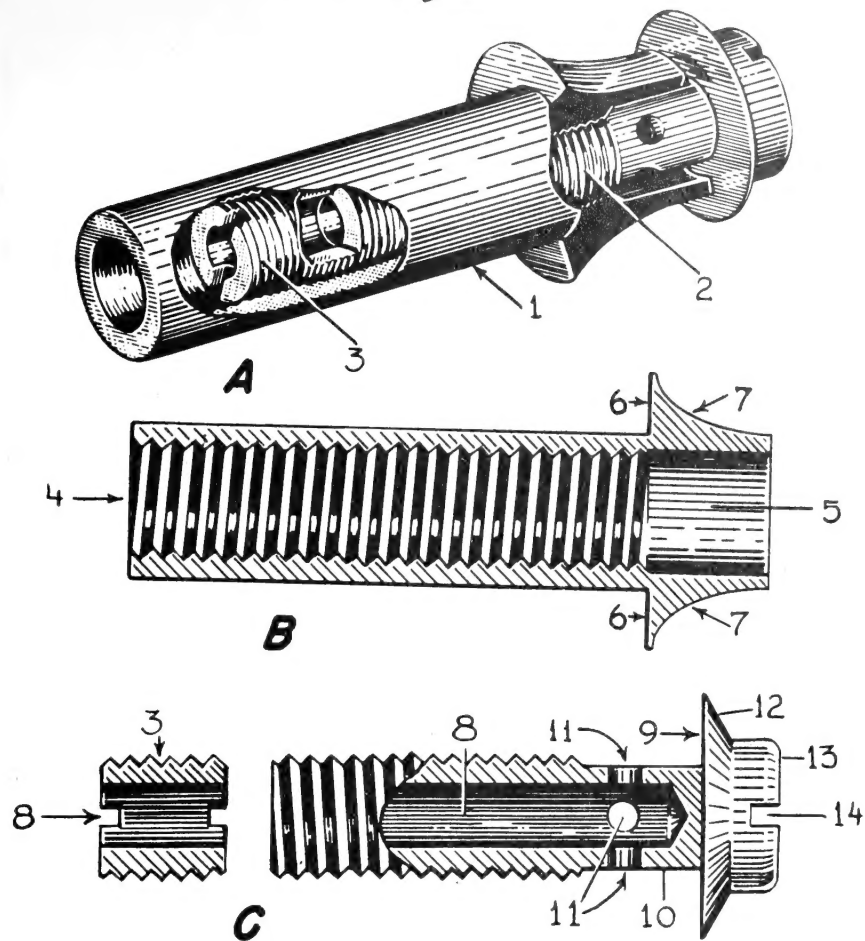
Views of nozzle, showing: A, Assembled nozzle, partly cutaway; B, barrel in cross section; C, adjusting screw, partly cutaway.
